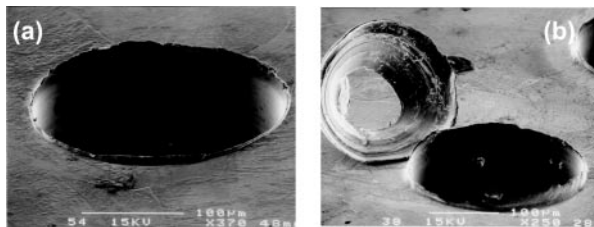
Burr types found in microdrilling: (a) uniform burr (10 mm/min; 8000 r/min); (b) uniform burr with a drill cap (5 mm/min; 8000 r/min)
